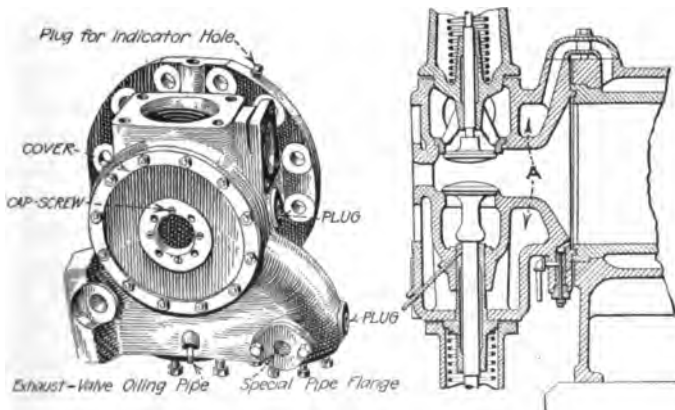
Allis-Chalmers Diesel cylinder head.
